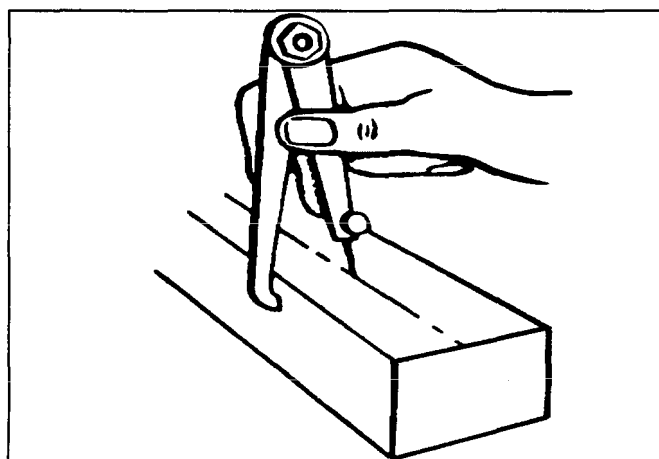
Laying out lines parallel to the edge of workpiece.
